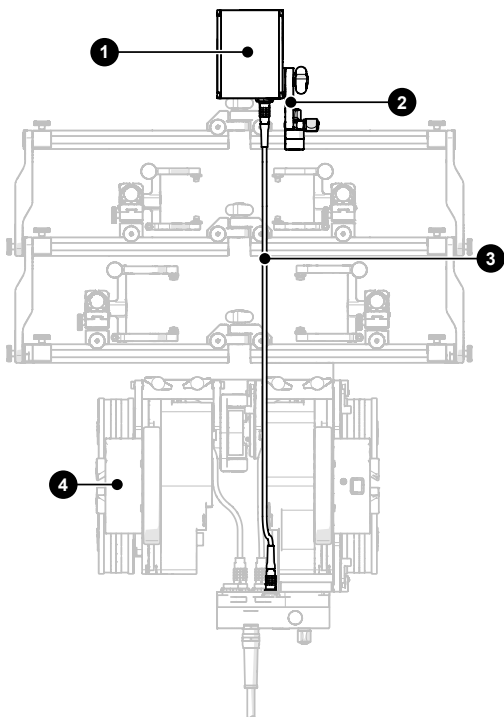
Tracker mounted to a pivoting probe holder frame
